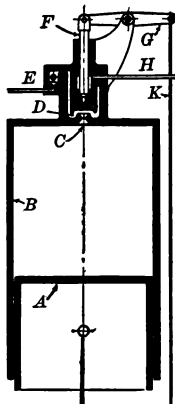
OPEN FUEL-INJECTION NOZZLE
